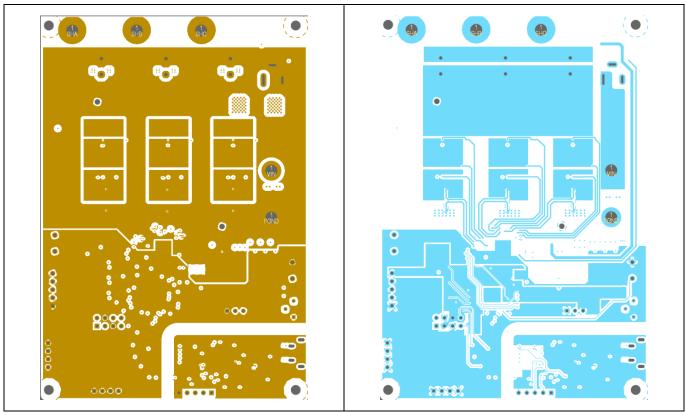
EVAL_6EDL7151_36V_1kW PCB internal layers 1 (left) and 2 (right)
